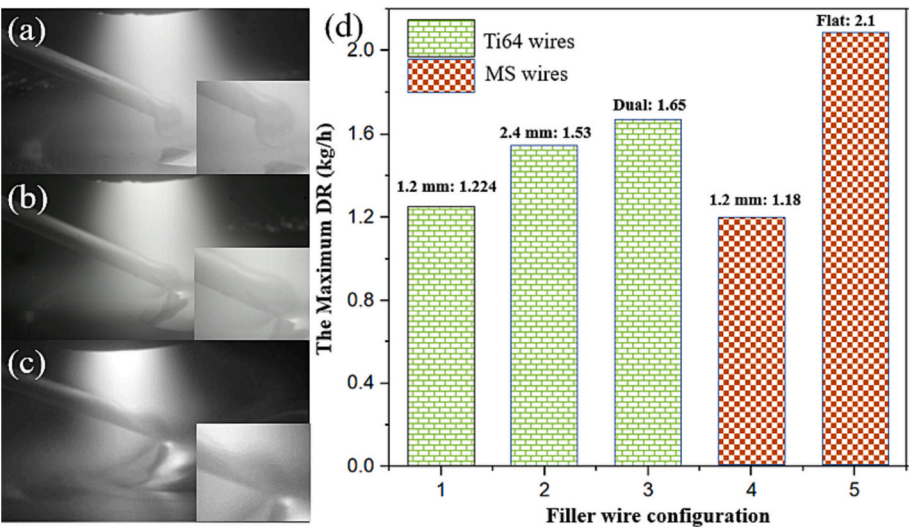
Wire melting and metal transfer with different WFS for the 1.2 mm Ti wire, and the highest DRs for the configurations 1–5 (d): (a) 3.5 m/min; (b) 4.0 m/min; (c) 4.5 m/min.
